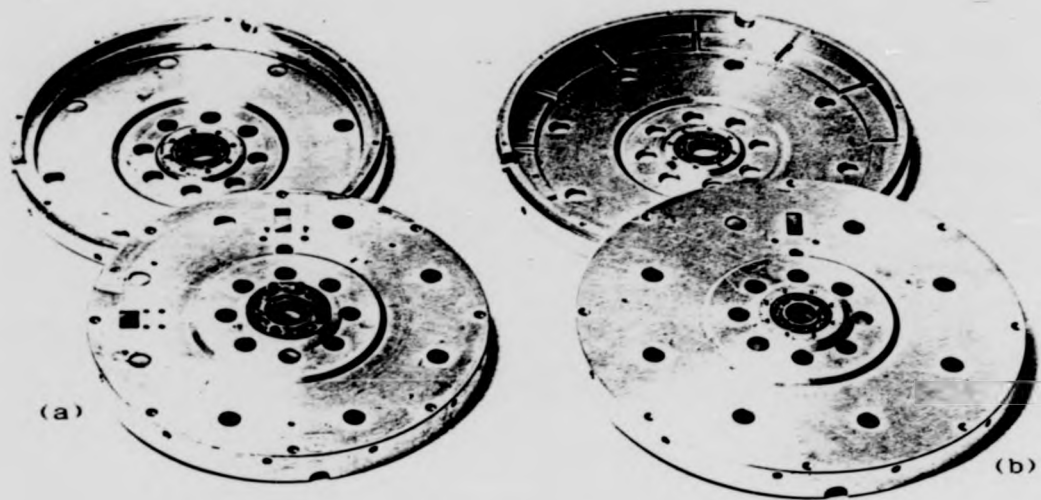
Casings of (a) Motors 1 and 2, and (b) Motor 3
